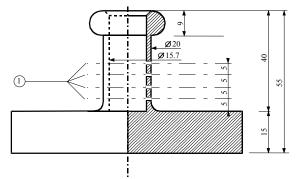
Hollow bronze cylinder, closed at one end; Plan and cut dimensions in mm
